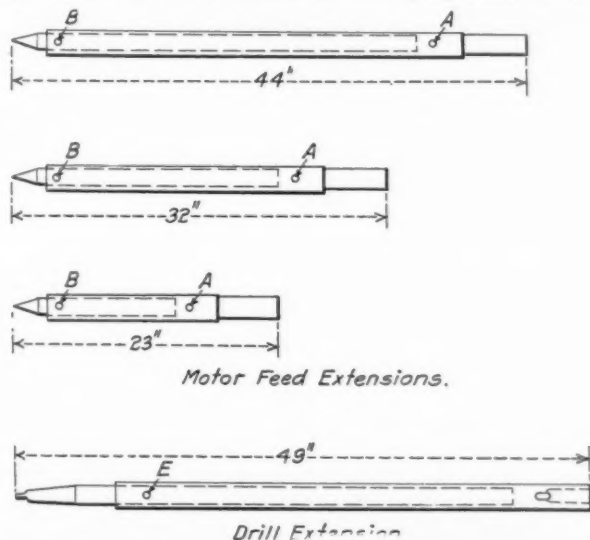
Sizes Used for a Set of Drill Motor Extensions
